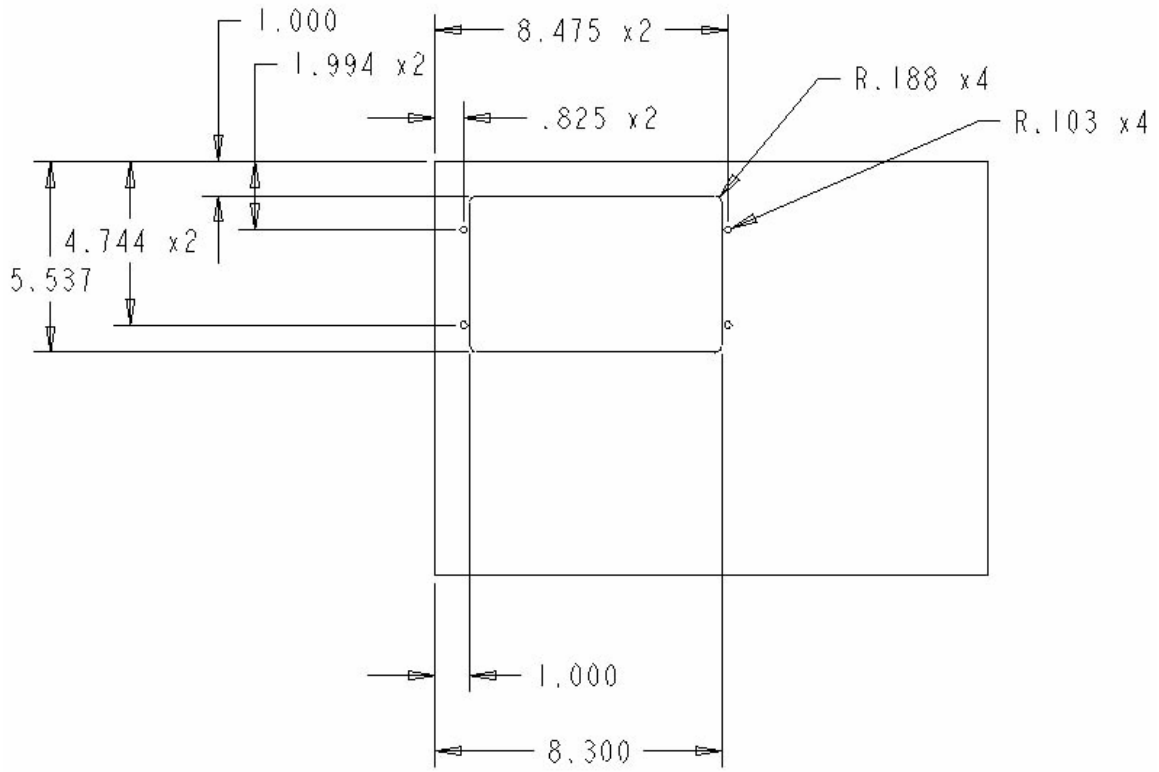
Dimensioned Drawing of NEMA Type 1 Enclosure Lid
